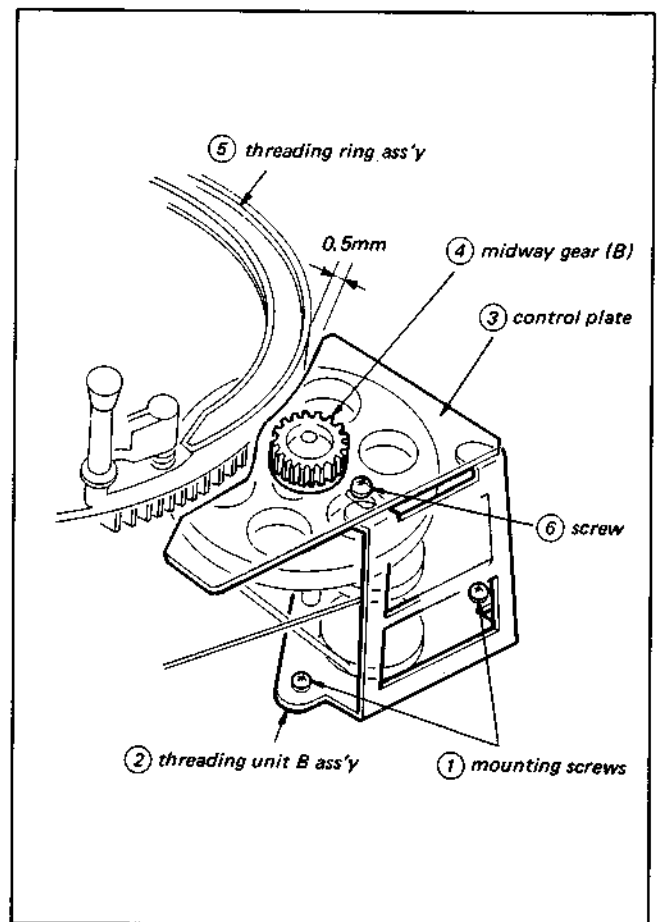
Position adjustment of threading unit B assembly and control plate
